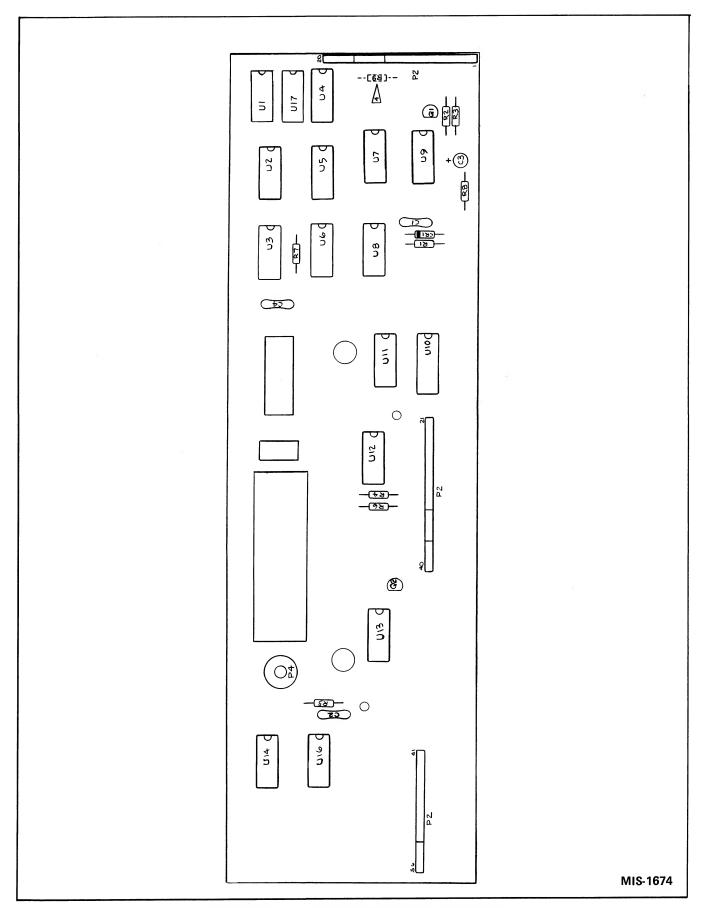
IEEE-488-1975 Piggyback PCB Assembly
